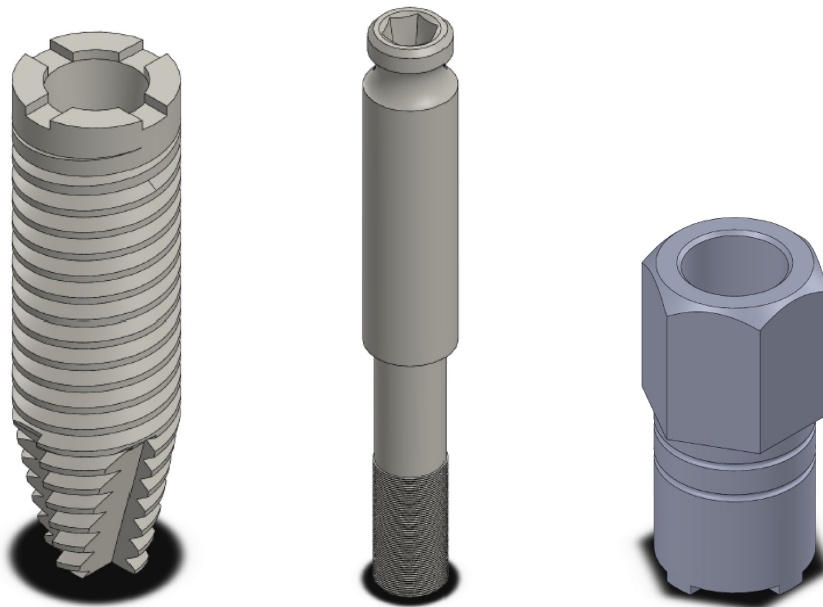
Picture of the implants parts in a 3D CAD software.
